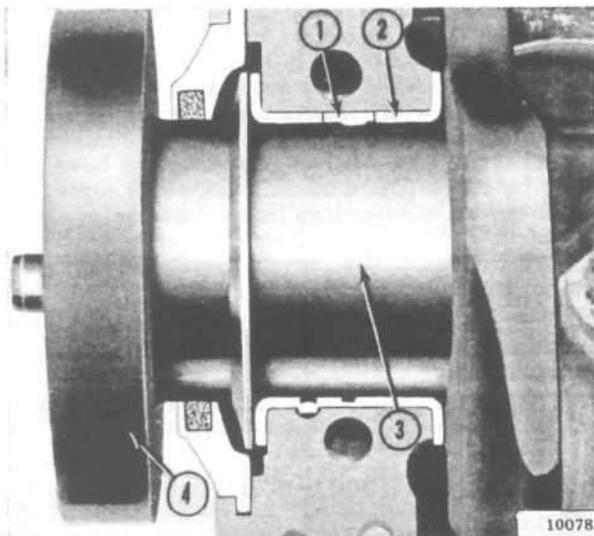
REMOVING MAIN BEARING UPPER HALF WITH ENGINE INSTALLED
